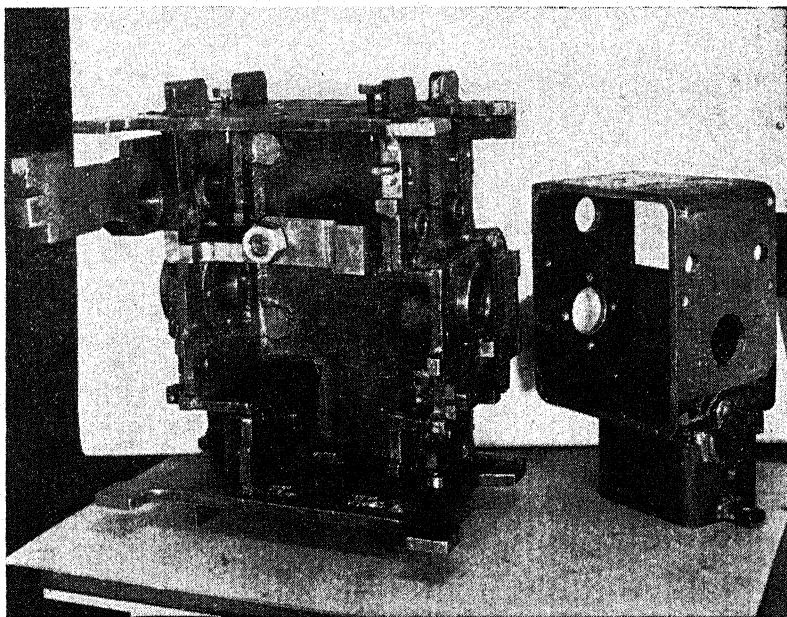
Arc welded drill jig and the frame it is used to drill.
